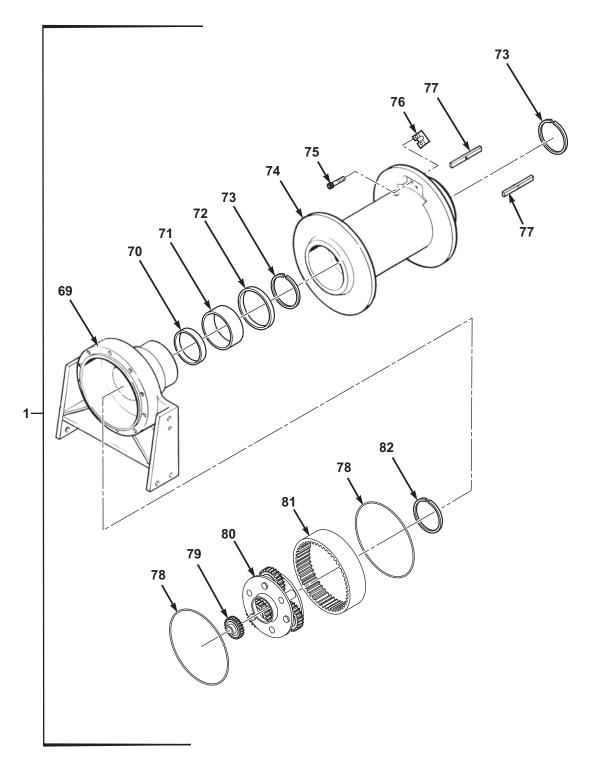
WINCH ASSEMBLY (Sheet 3 of 5)
